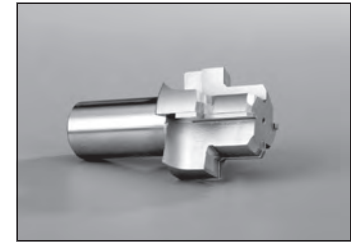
BSPP Straight Thread Port Counterboring Tool
